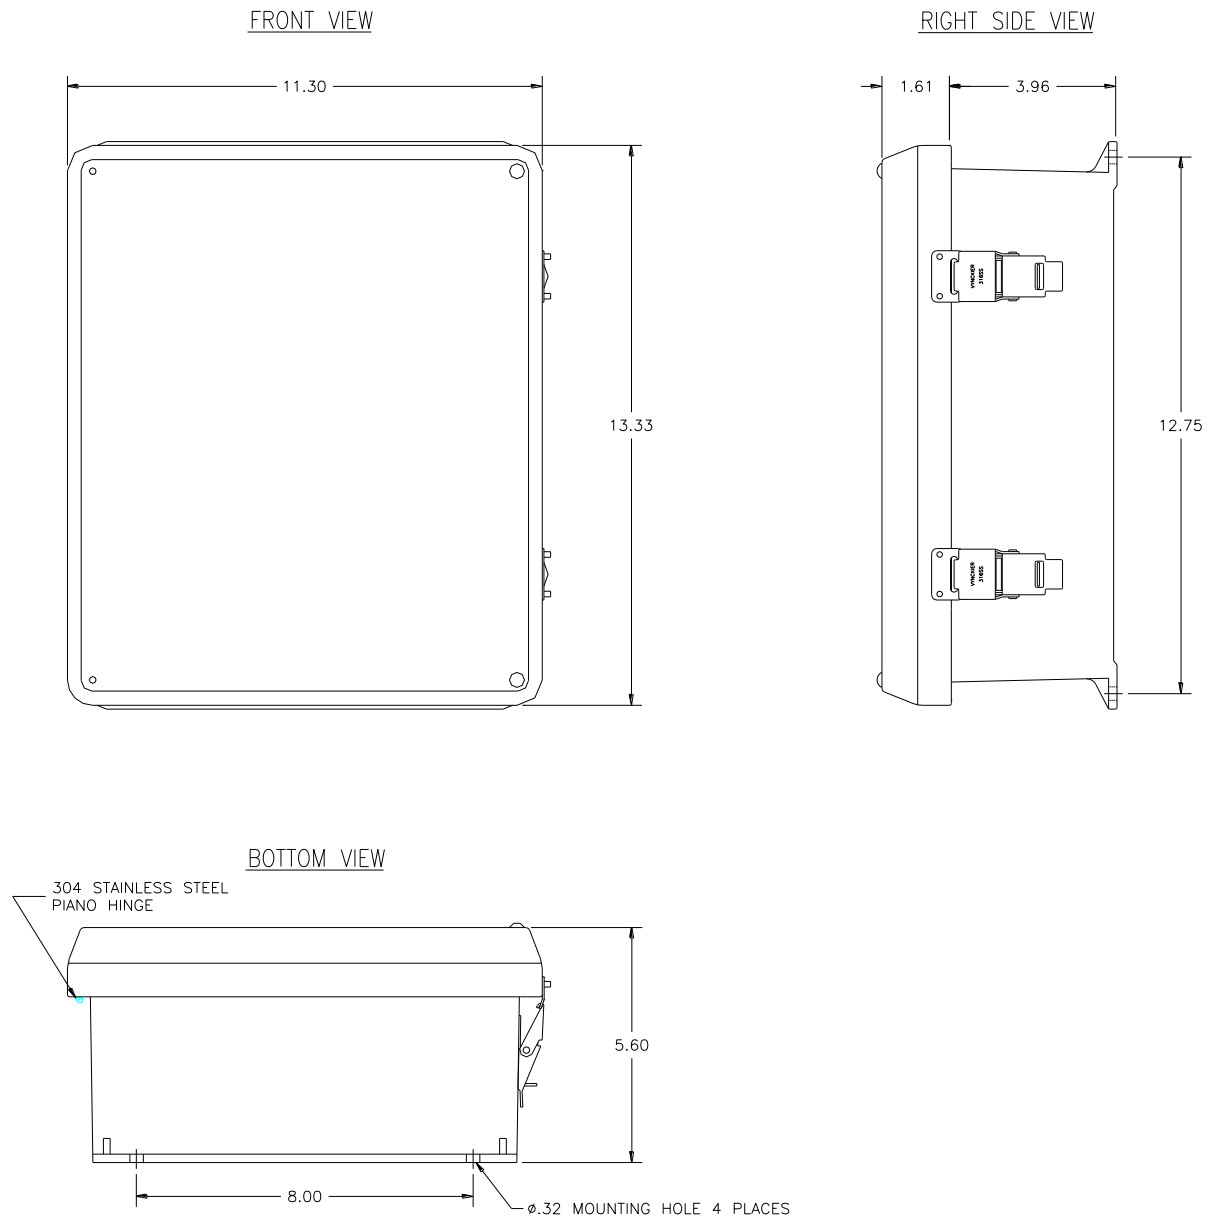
Enclosure Mounting Footprint (Vynckier)
